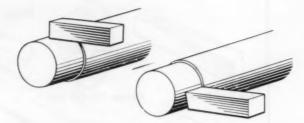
Cutting tools and Blades Commonly used on automatic screw machines.
